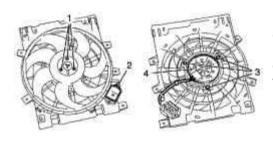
Removing the motor: 1 - mounting screws, 2 - attachment bolt connector, 3 - bolts fixing electric fans, 4 - electric auxiliary fan
